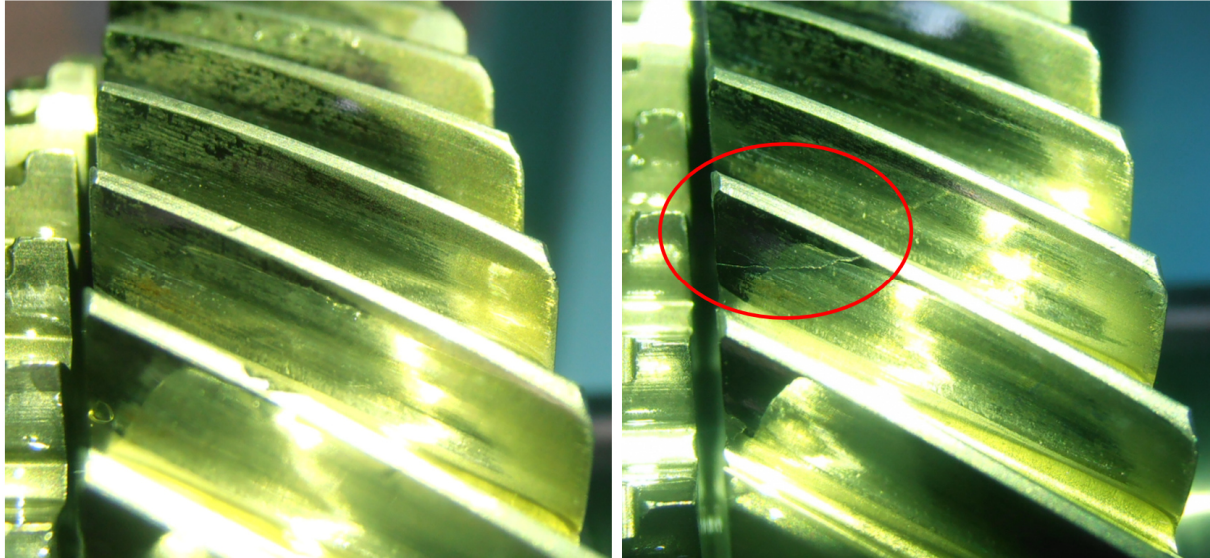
Gearing appearance during the test of asymmetric rolled PM gears with ground coast flanks after 1 hour (left) and after 1,5 hours (right, tooth breakage).
